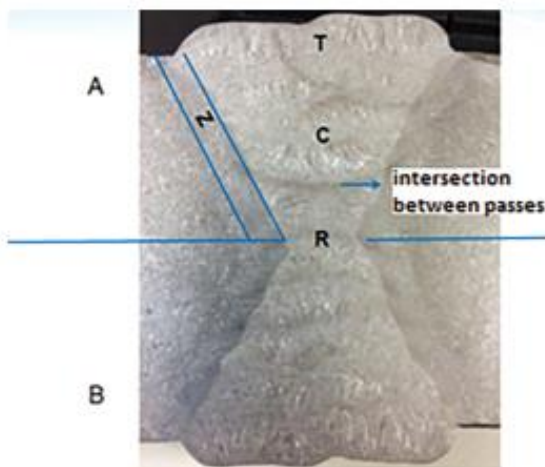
Illustration of the sequence of weld passes, side A, side B, and root.
